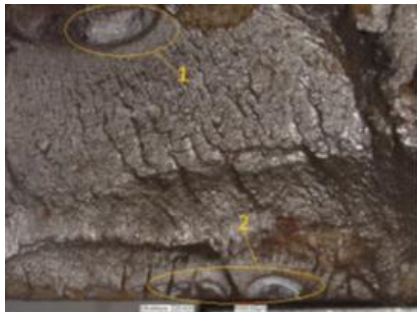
View of the fracture surface of the damaged rim fragment with marked zones 1 and 2 indicating signs of fatigue wear
